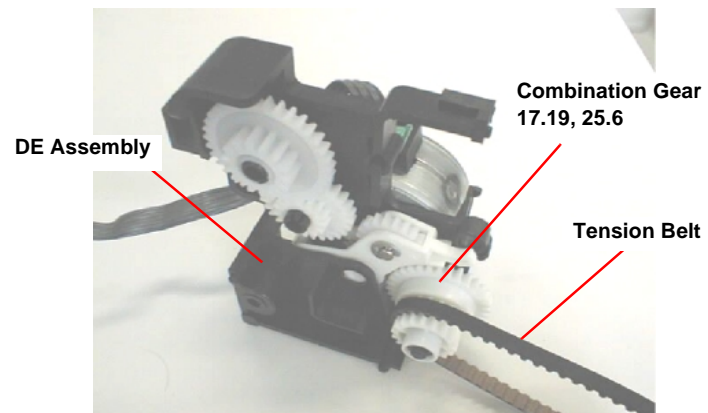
Setting the Tension Belt to 17.19 Gear
